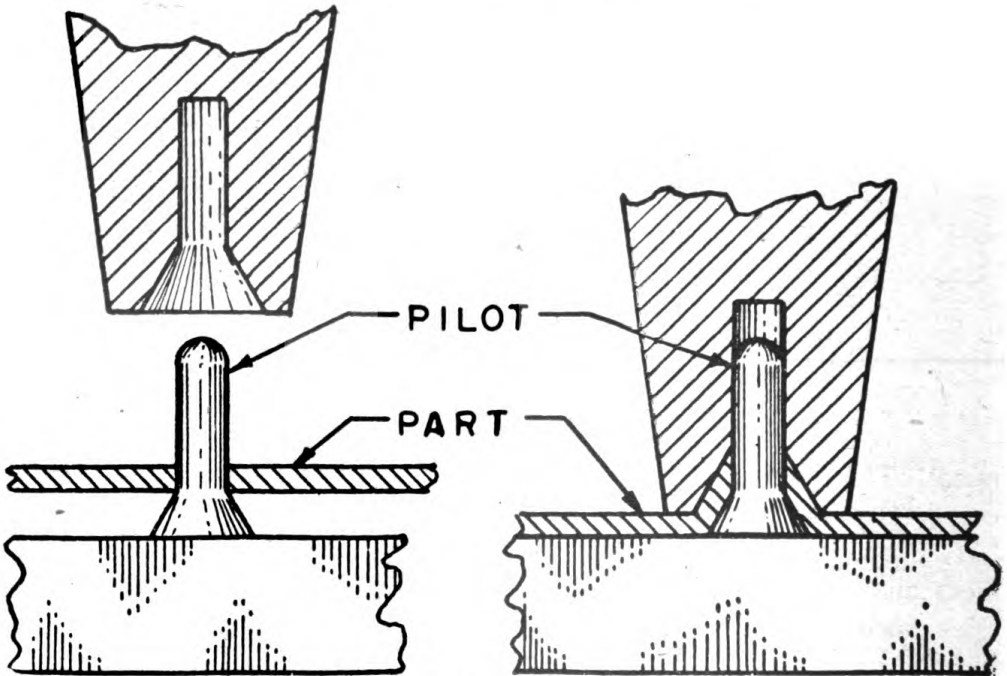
Dimpling sheet metal with a pneumatic hammer.
